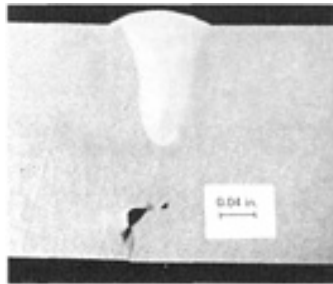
ELECTRON-BEAM COLD WIRE-FEED WELD IN BERYLLIUM. COURTESY OF ROCKWELL INTERNATIONAL ENERGY SYSTEMS GROUP
